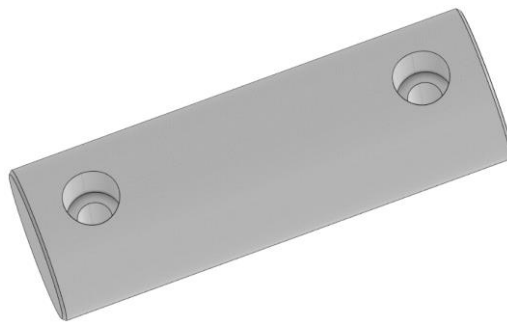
The cylindrical “key” with holes to fasten it with screws the overall length of the cylinder is 150mm and the outer diameter is 50
